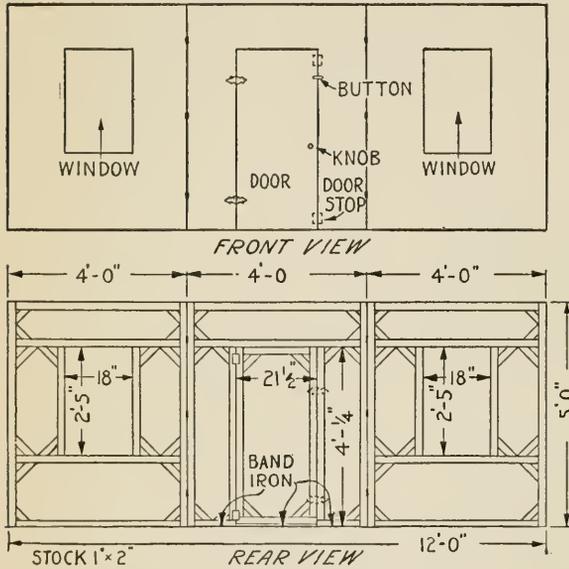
Assembly of the play screen showing front plan of the door and windows and scenerylike construction of the back members.
